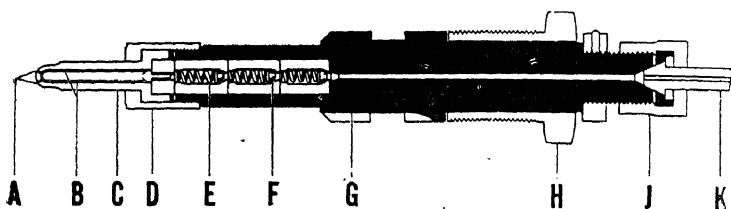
The Hesselman Fuel Injection Nozzle.
